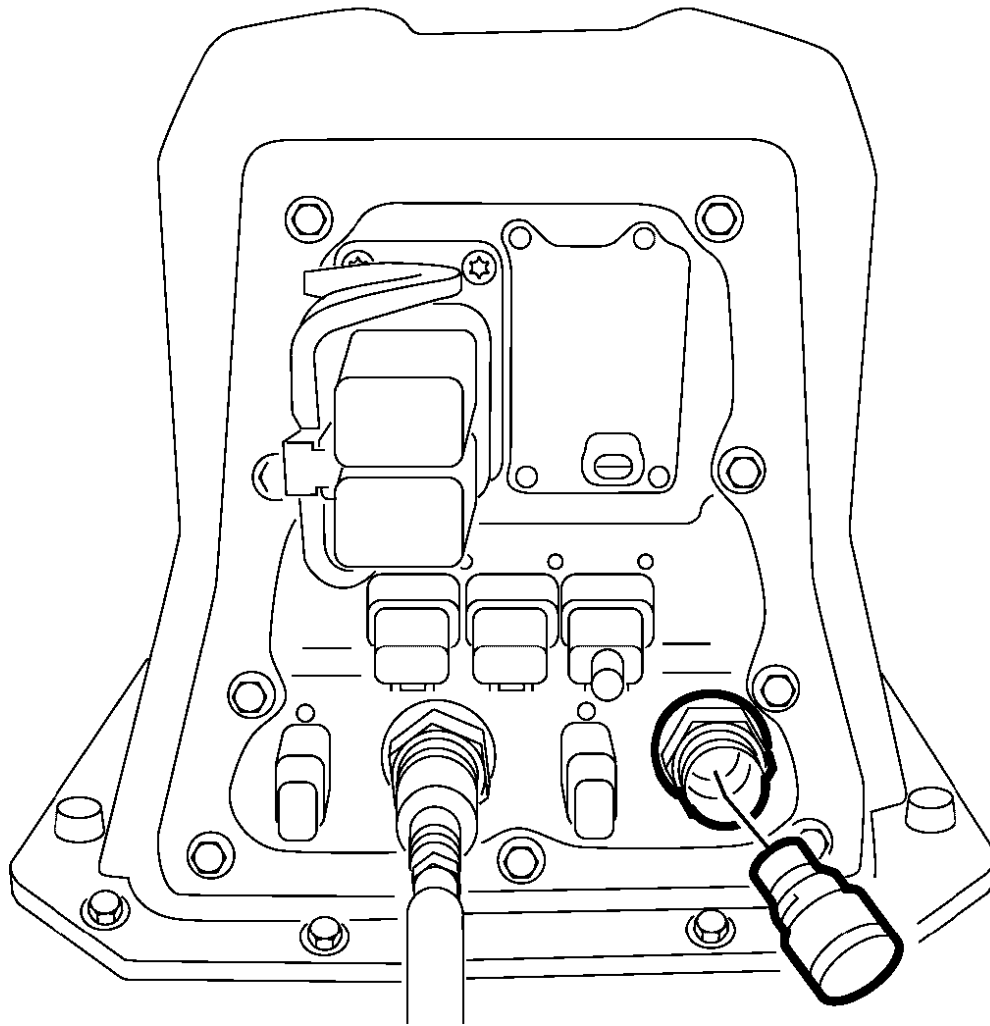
GE-50385 Plug to Break Vacuum And Purge Battery Of Coolant
